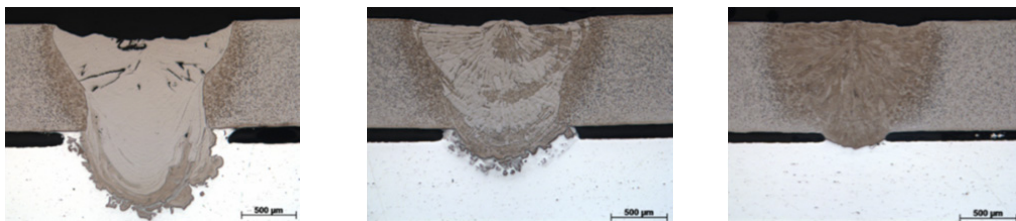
Cross-sections of laser beam welded dissimilar joints of HX220LAD+Z100 ( $t = 1.00$  mm) and AA6016-T4 ( $t = 1.15$  mm) with a varied energy per unit length of 45.00 kJ/m [left], 43.27 kJ/m [center] and 41.67 kJ/m [right].
